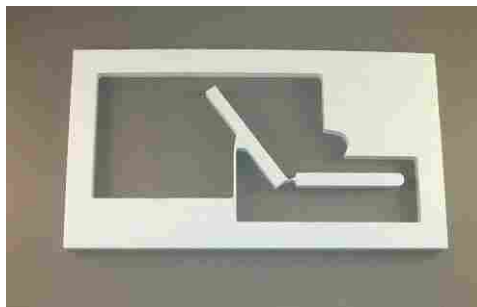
Manufacturable configuration of the final compliant four-bar mechanism.
